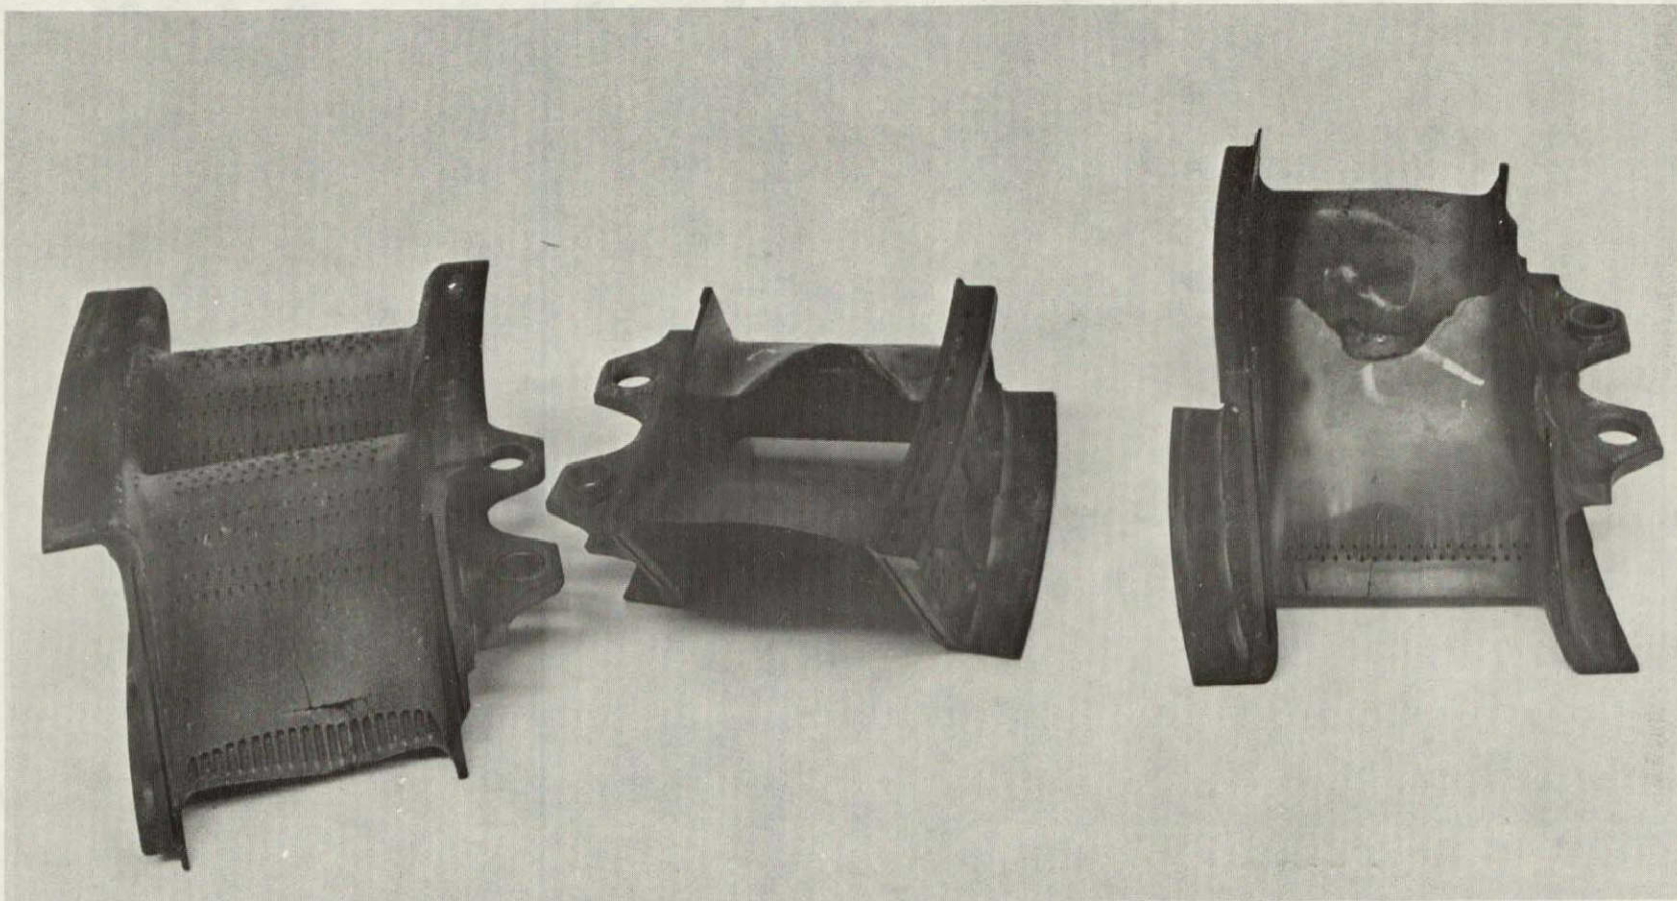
Stage 1 HP Turbine Nozzle Assembly Distress, Aft End.
